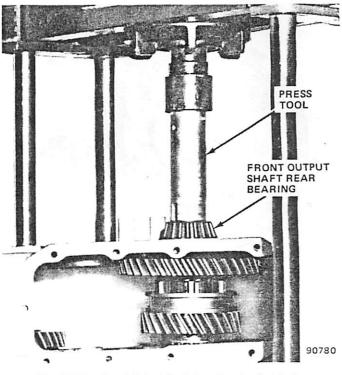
D-82 Front Output Shaft Rear Bearing Installation
